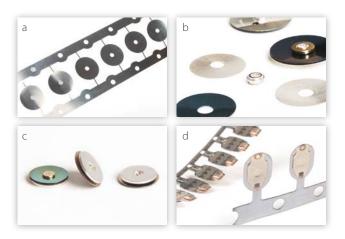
Non-welded (i.e. undamaged) centric hole discs (a) operate continuously due to an additional mechanism (b, c). If welded bimetallic discs (d) become welded, however, they work intermittently.
